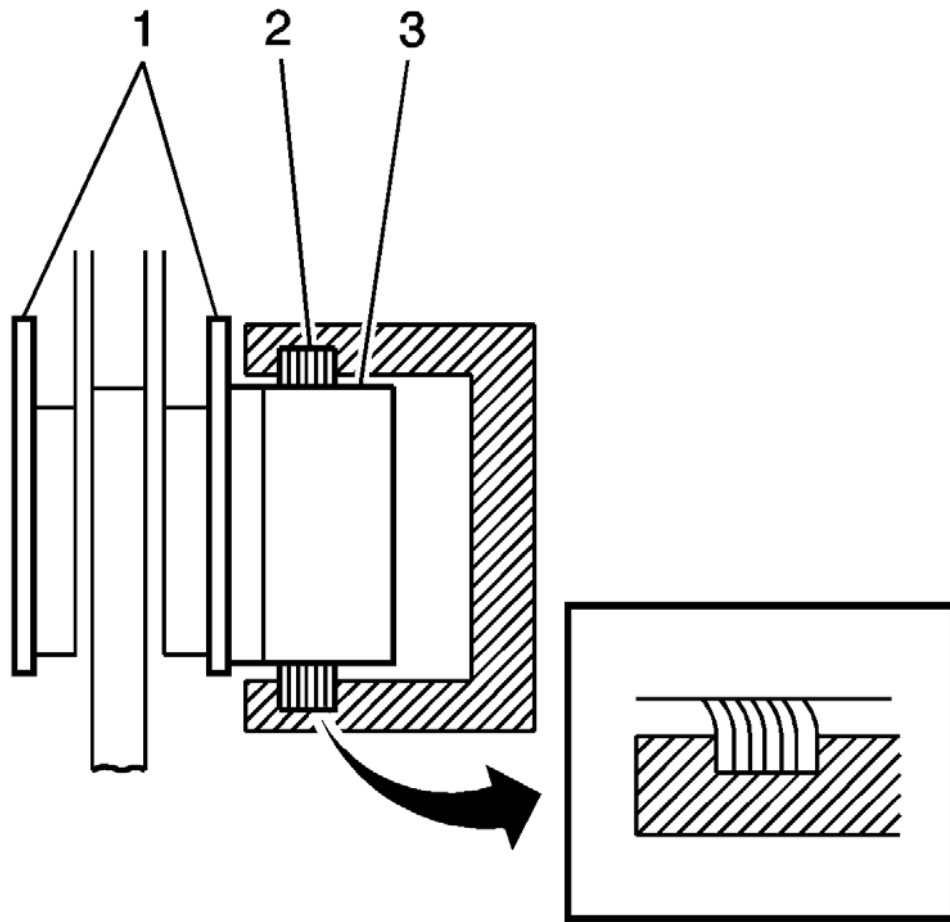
Sectional View Of Pads, Piston Seal And Piston
